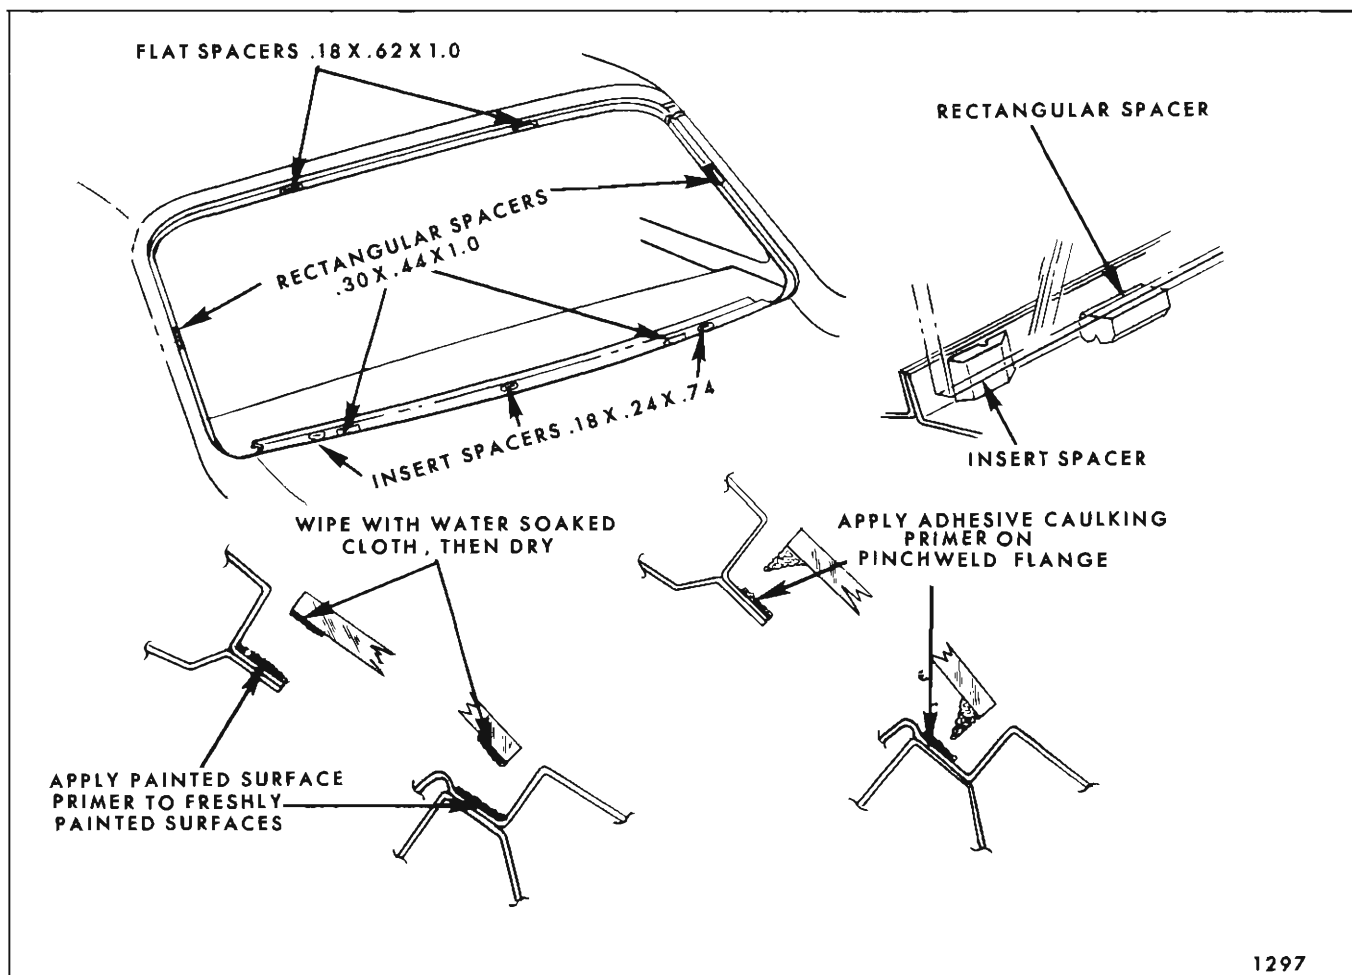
F3—Adhesive Caulked Back Window Spacer Installation
